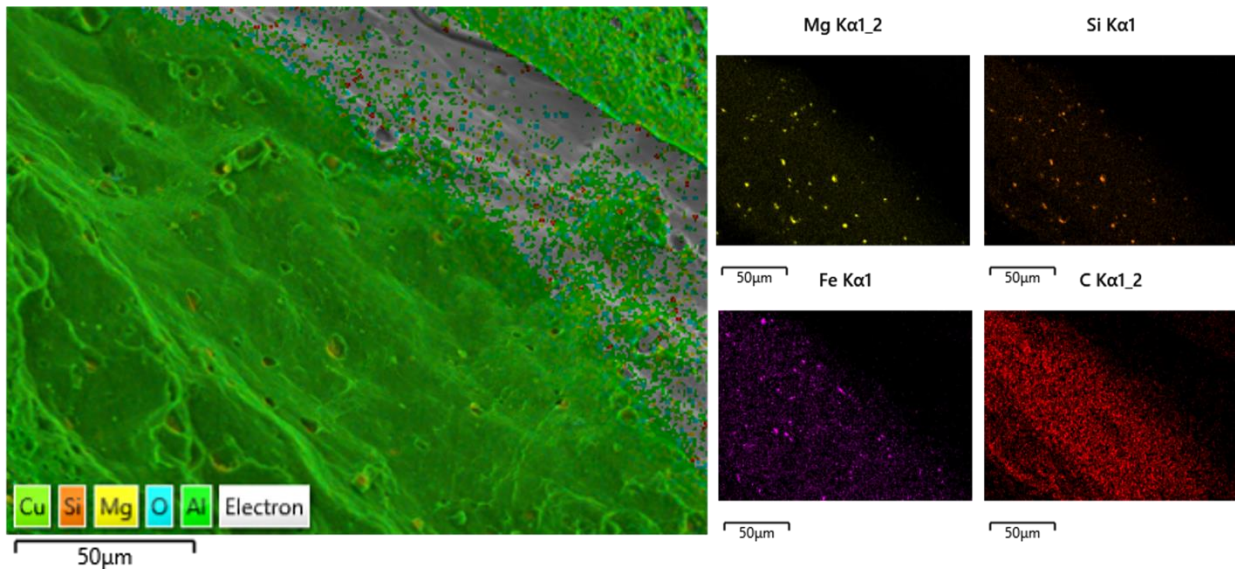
The heat treated fracture surface also had Si and Mg rich particles that were evenly dispersed on the smooth section of the fracture surface in sample AFSD Z 6061-T6 #7.
